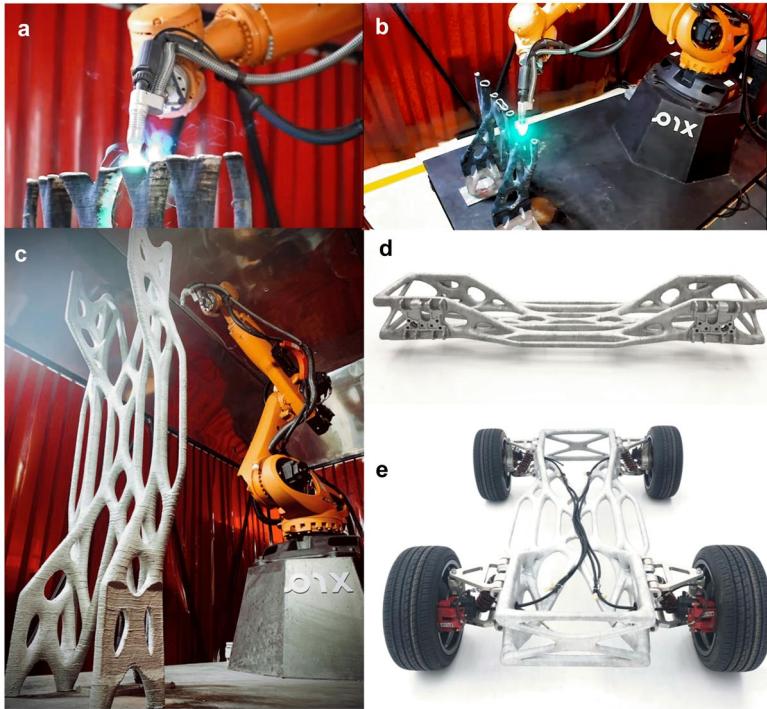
(a), (b) and (c) Manufacturing process; (d) Chassis printing part; (e) Chassis assembly
